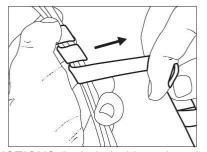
, SPIRAP HAND TOOL INSTRUCTIONS (included with each tool)
